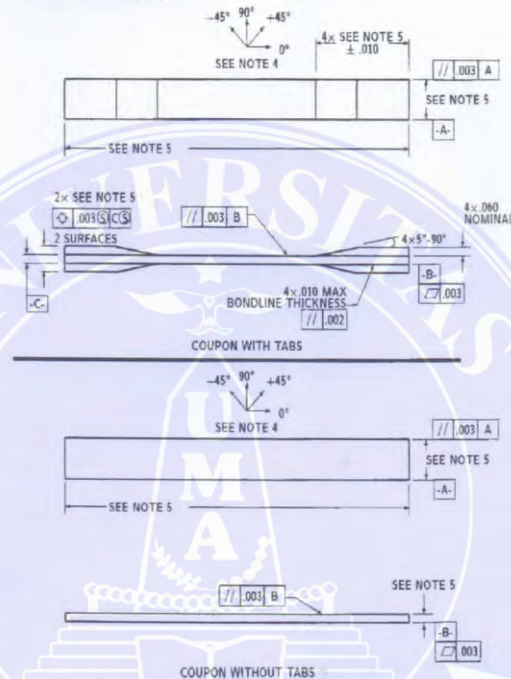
Tension Test Specimen Drawing (inch-pound)
